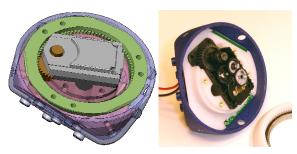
Meshing of a modified AX-12 servo motor with the Molecube internal gear. AX-12 front wall is removed.
